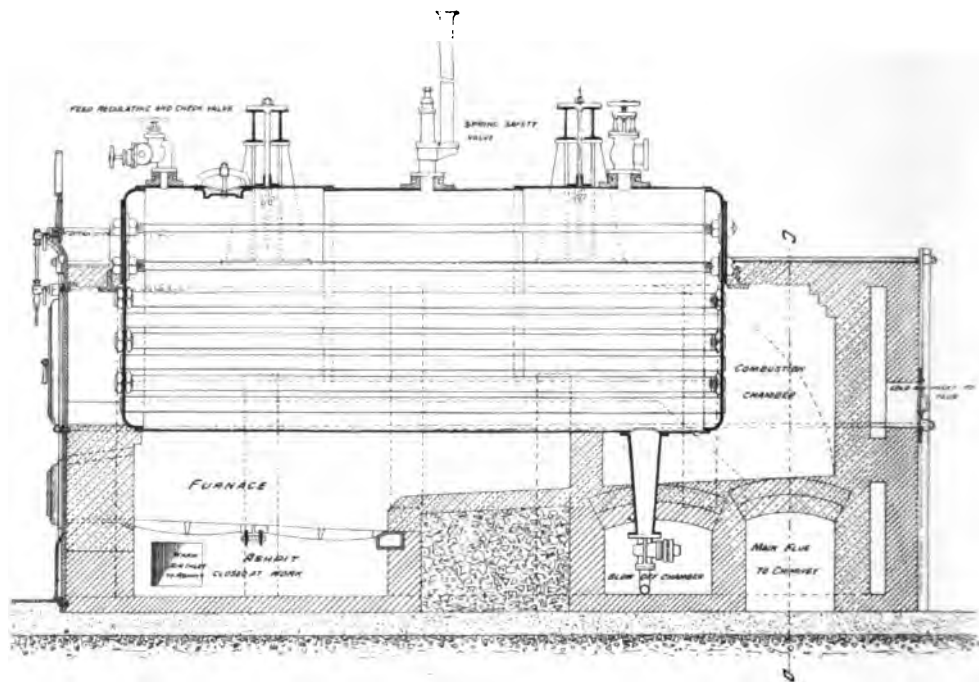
MULTITUBULAR BOILER—LONGITUDINAL SECTION.
